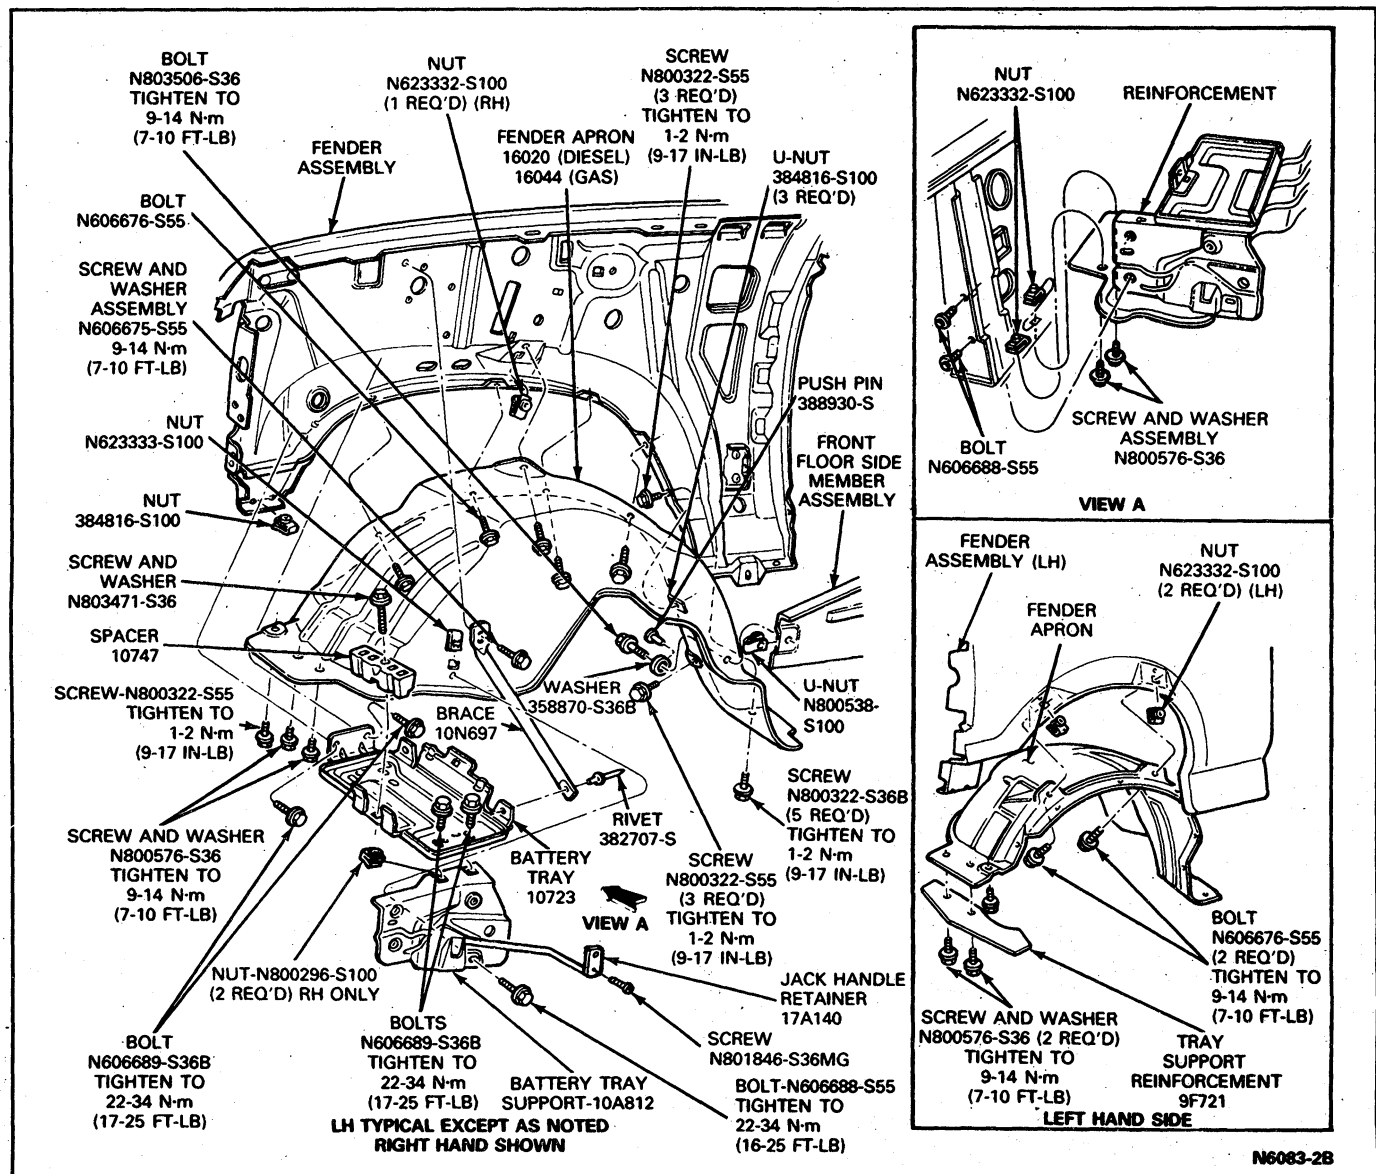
Fender Apron Installation, Right Side—F-150—F-350 and Bronco
